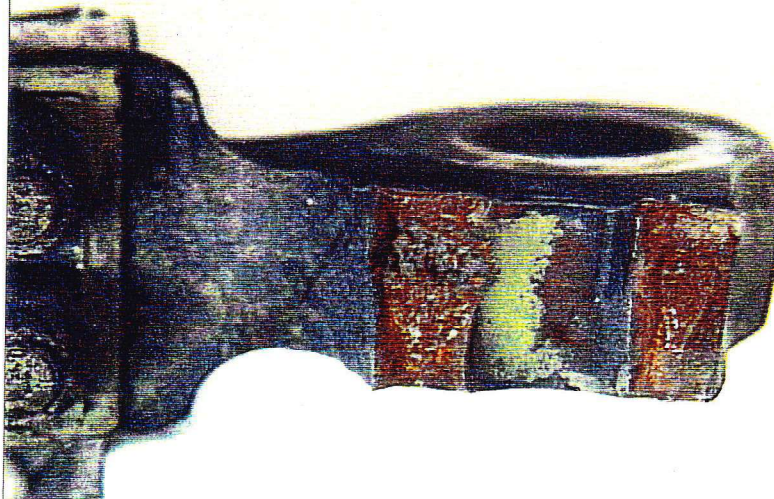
View on fracture surface of upper tang typical of stress-corrosion cracking starting from the corner. Note the beaten area on top. Magn. 1.5x.
